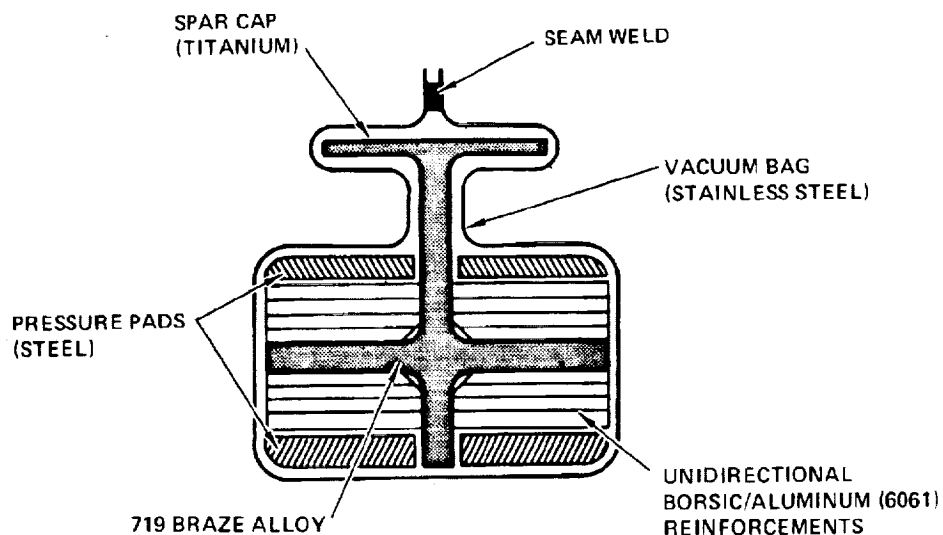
Borsic-Aluminum Reinforced Truss Spar Caps - Autoclave Curing Method
